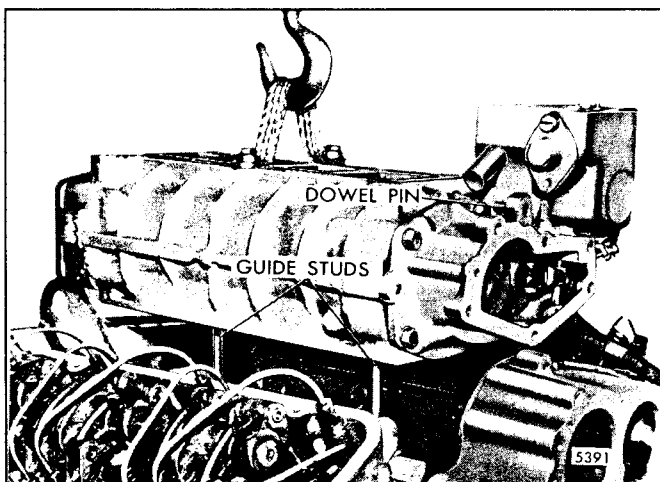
Removing/Installing Blower (6V-53 Engine)
